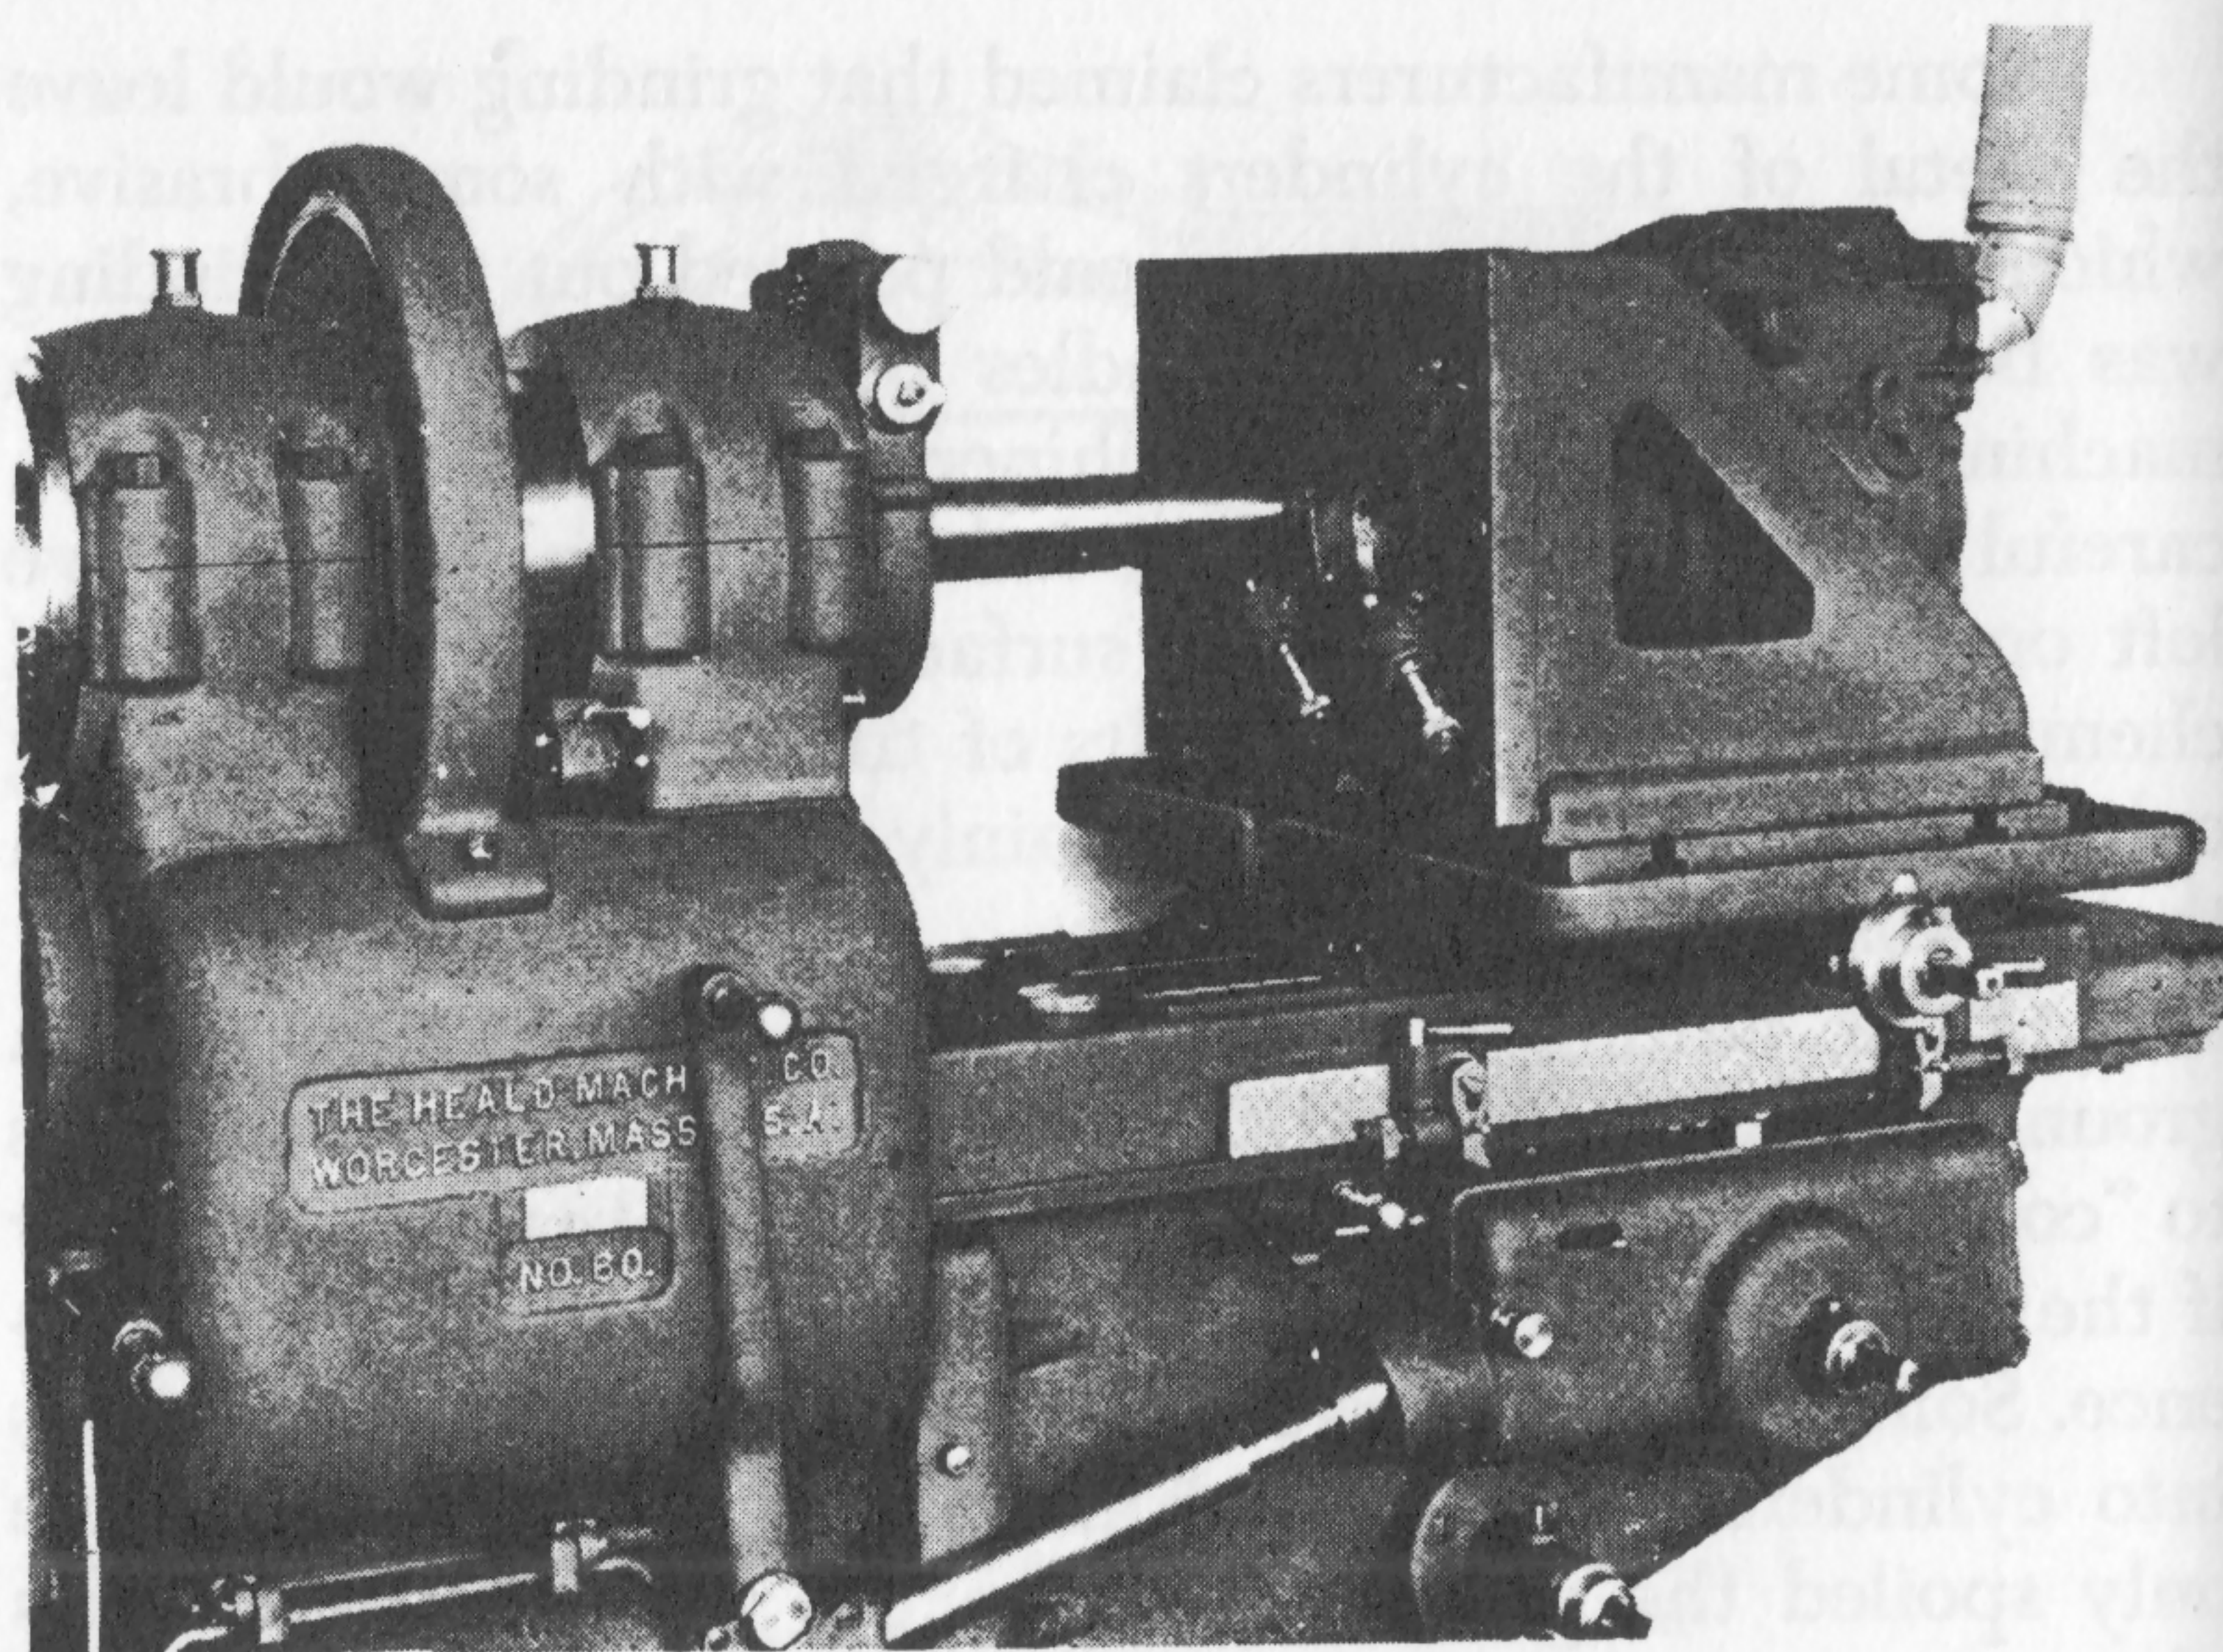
HEALD CYLINDER GRINDER WITH PLANETARY SPINDLE, 1905
